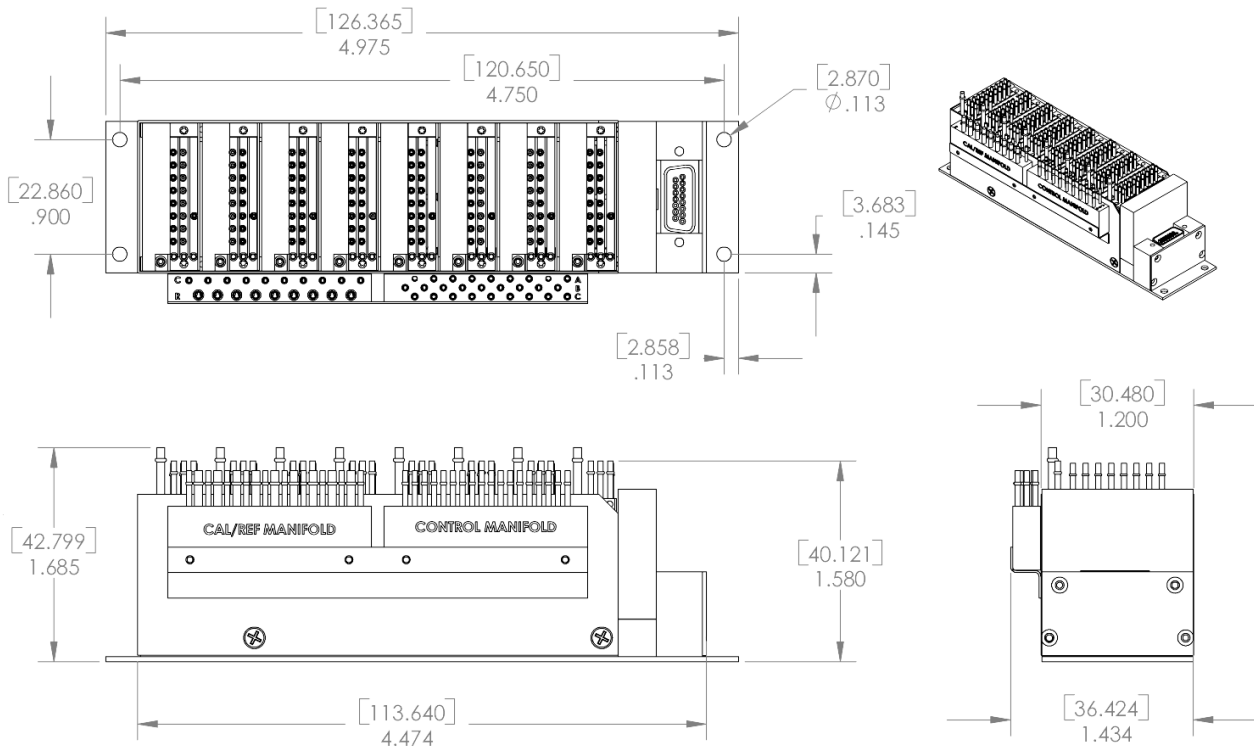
CURRENT ZOC33/64PXX2 DIMENSIONS [INCHES(MM)]
